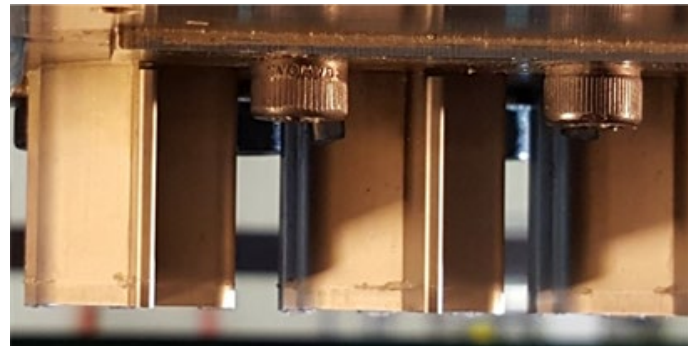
M Adhesive Residue on Stamping Tool after 5000 Cycles, 75 CPM
